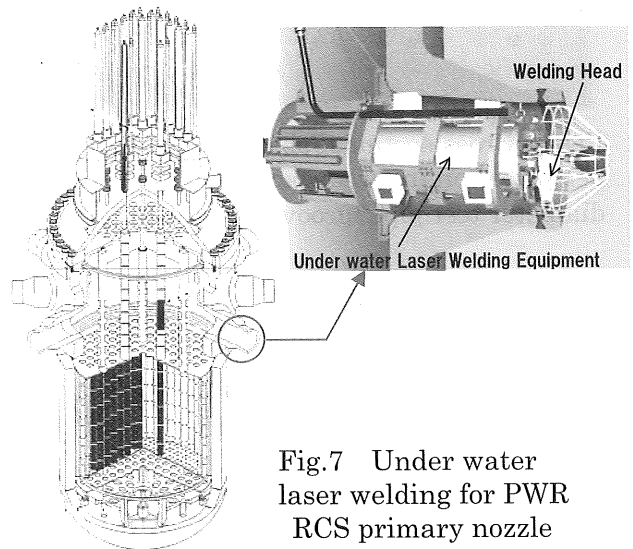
Under water laser welding for PWR RCS primary nozzle
